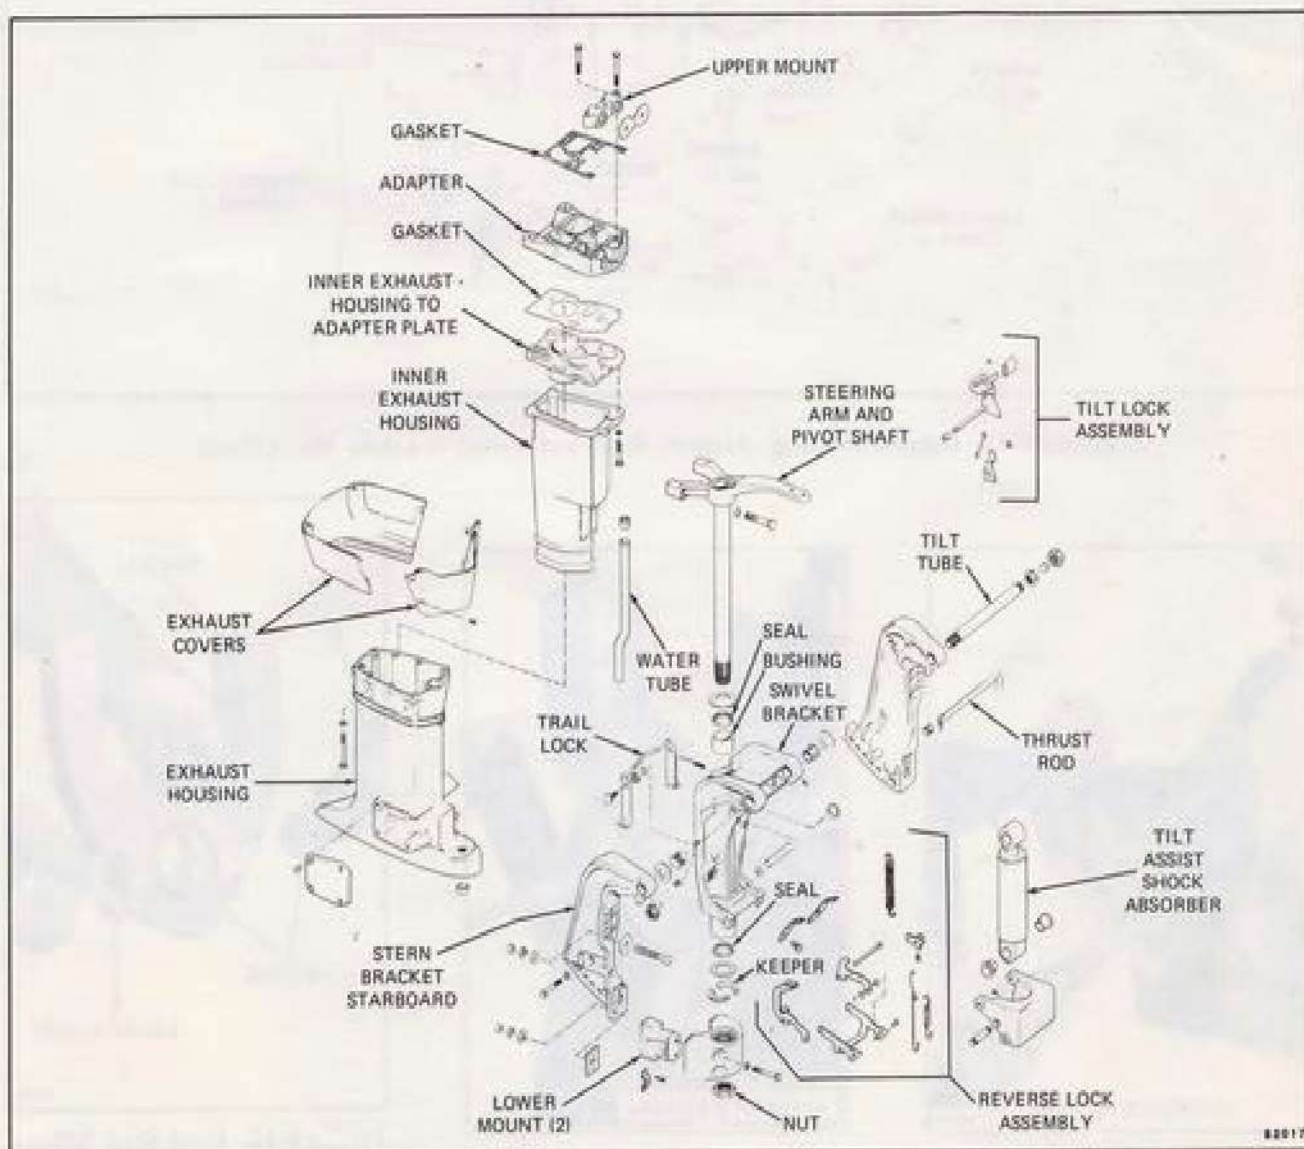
Exhaust Housing, Adapter, Stern and Swivel Brackets (70 HP Long Shaft)
